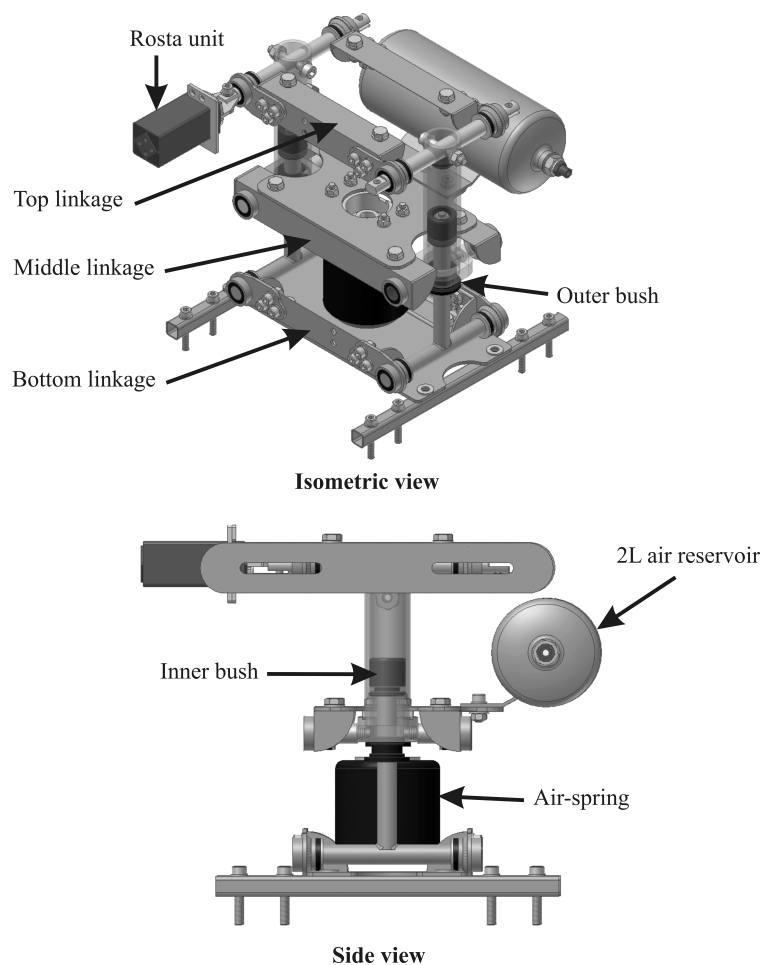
Original prototype design, with top seat attachment not visible in the isometric view
